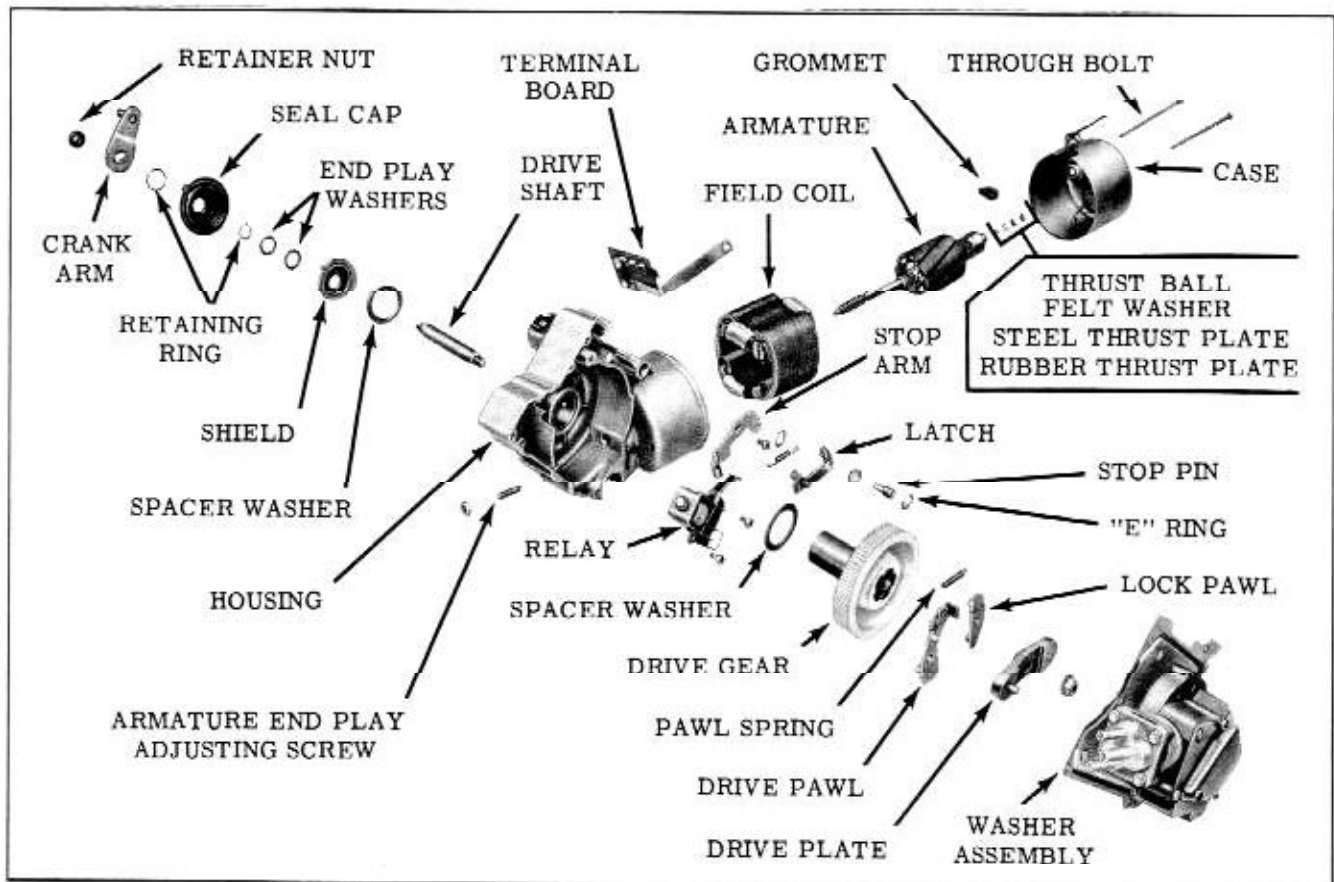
Wiper and Washer Assembly (Two Speed)
